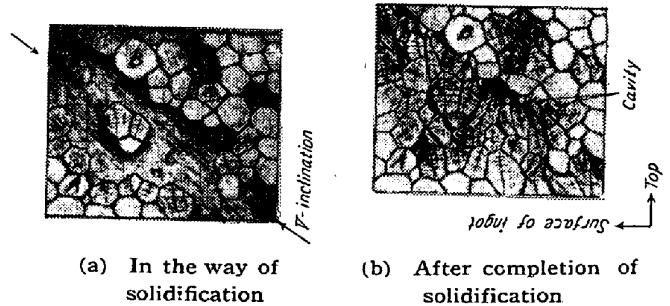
Imaginary picture of solidifying process of molten steel C.
